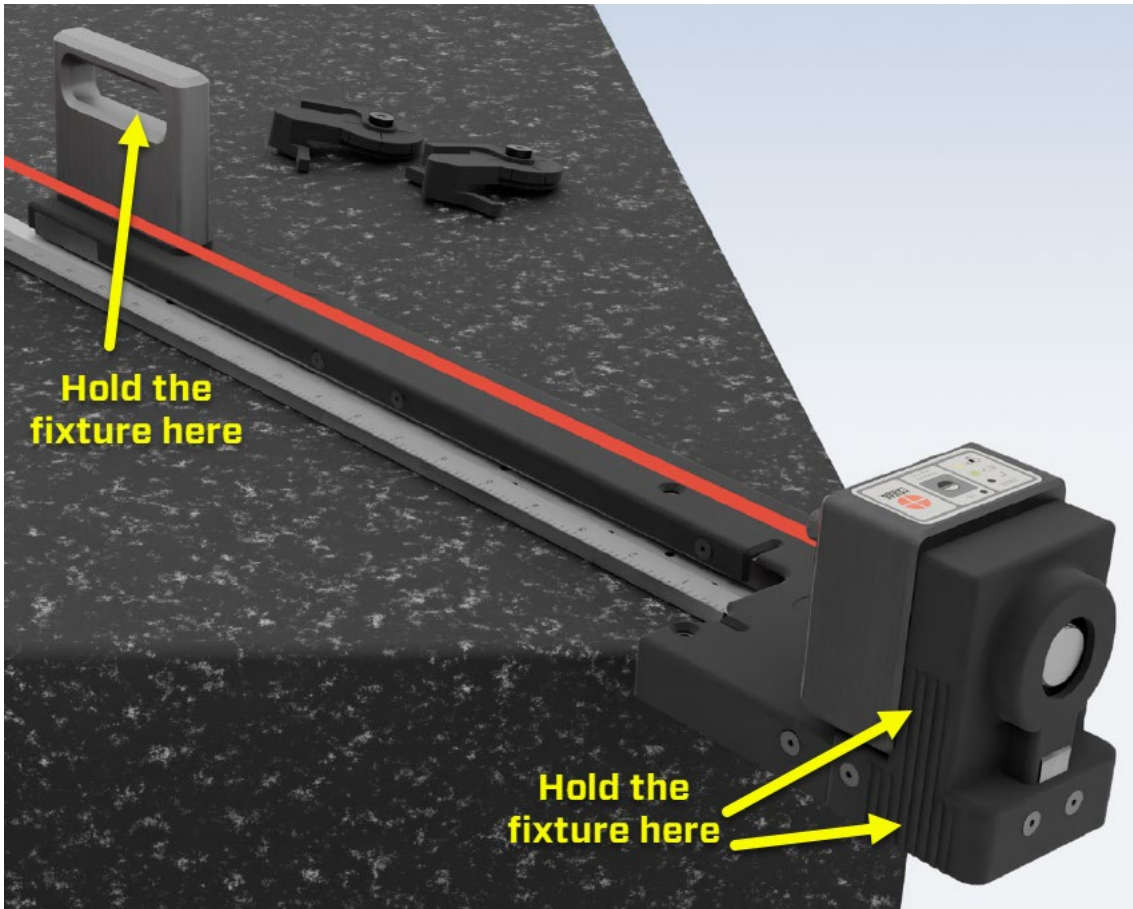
A-703SP-LM Laser Mounting Fixture Handholds
